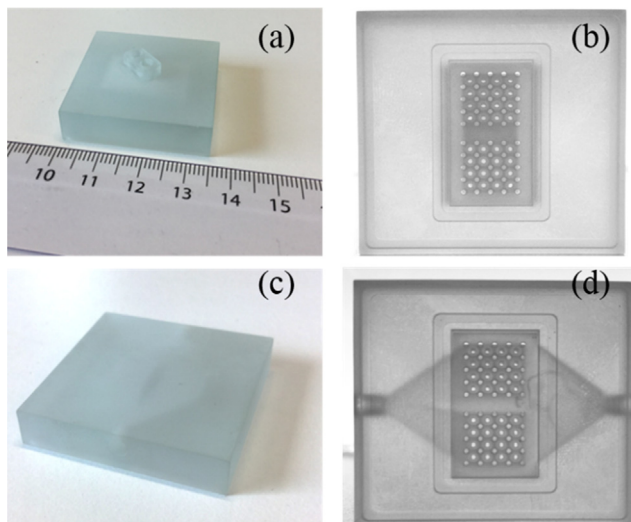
Dual-chip module cooler demonstrators: sideview (a) and bottom view (b) of vertical feeding cooler; sideview (c) and bottom view (d) of lateral feeding cooler.
